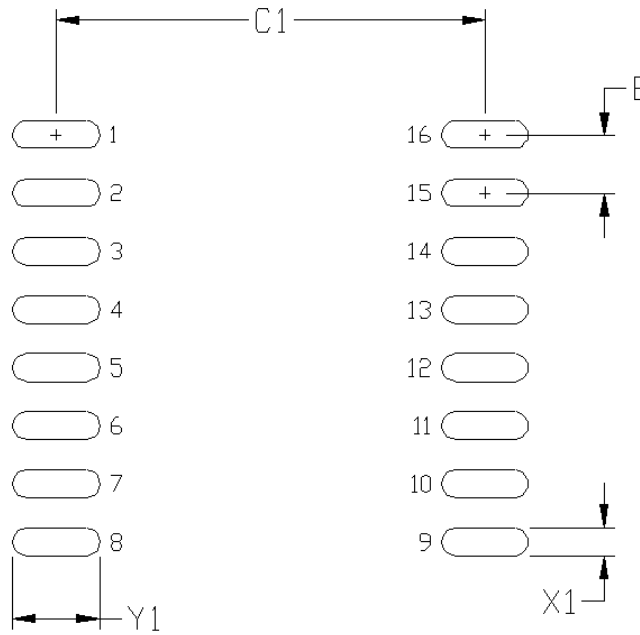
16-Pin Wide Body SOIC PCB Land Pattern
